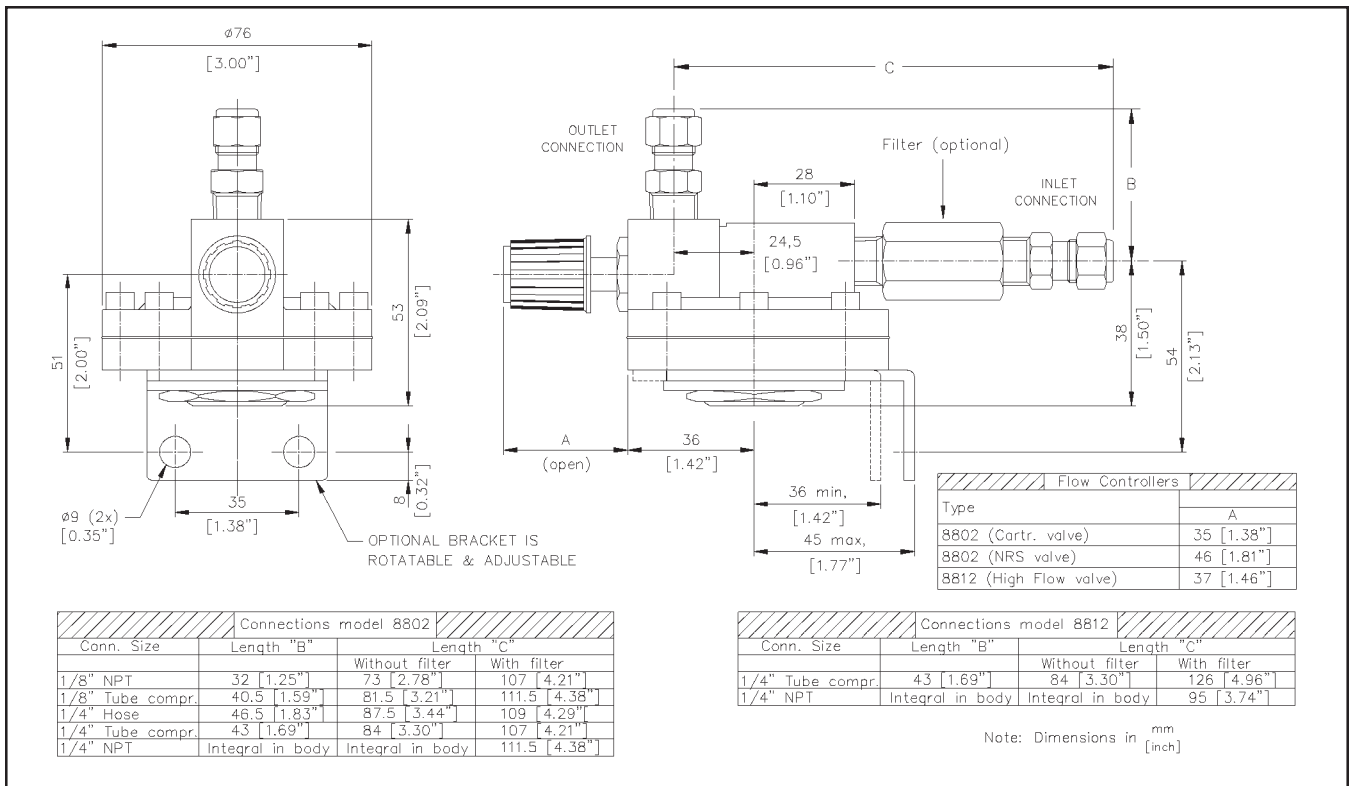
Dimensional Drawing Models FC 8802 and 8812
